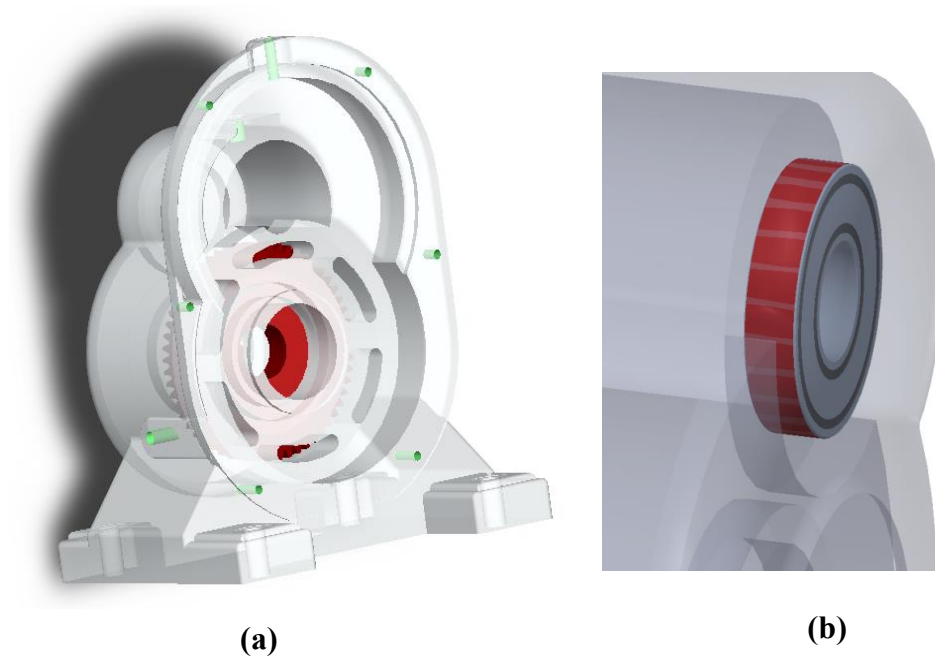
Example of component(highlighted in red) that cannot be assembled(A), example of parts with intersecting geometry(B)
